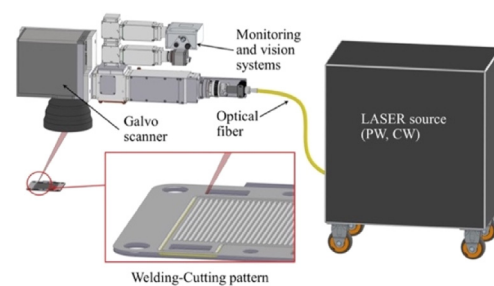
Schematic of laser-based cutting, welding and structuring processes for fuel cell bipolar plates.
